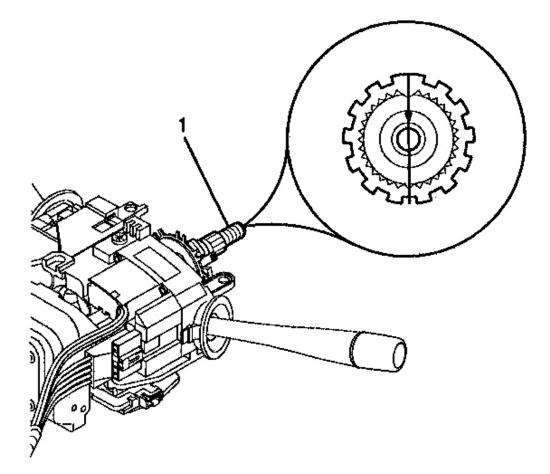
View Of Block Tooth Of Steering Shaft Assembly In 12 O'clock Position Courtesy of GENERAL MOTORS CORP.
